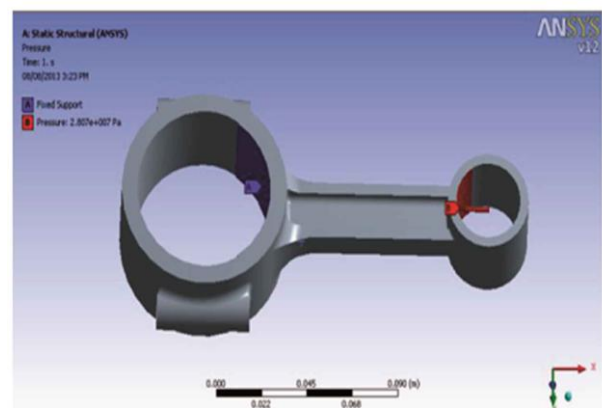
Compressive Load at Piston Pin End for AISI 4340
